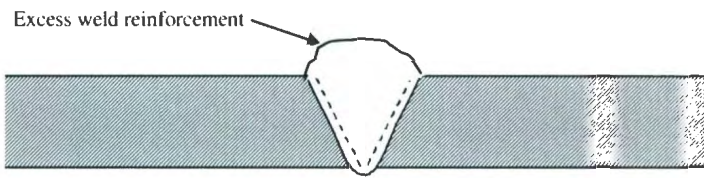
Excess weld reinforcement in a welding joint
